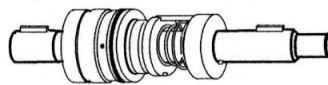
Typical Shaft-Seal Assembly for "GC-1" and "MC-1" Series
